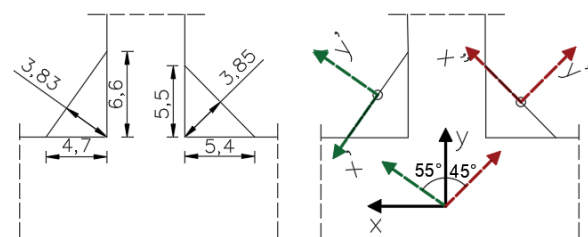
Weld geometry and rotation of coordinate system. The left weld represents the weld produced during the first run, and the right weld represents the one that was produced last
